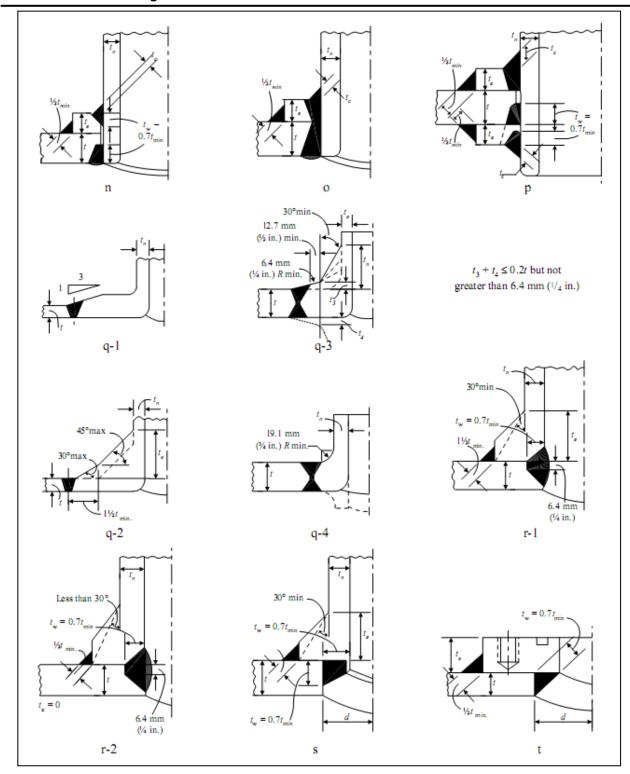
Types of fusion-welded construction details (continued)
